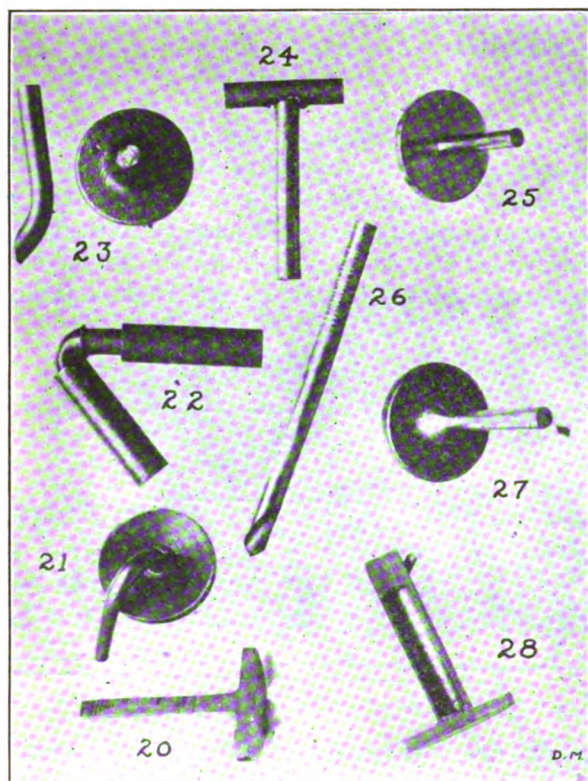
EXAMPLES OF ELECTRO-PERCUSSIVE WELDING
